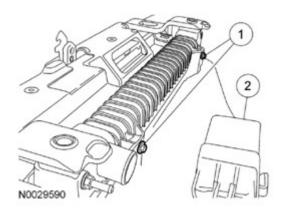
Removing Cooling Fan And Clutch Assembly Courtesy of FORD MOTOR CO.
